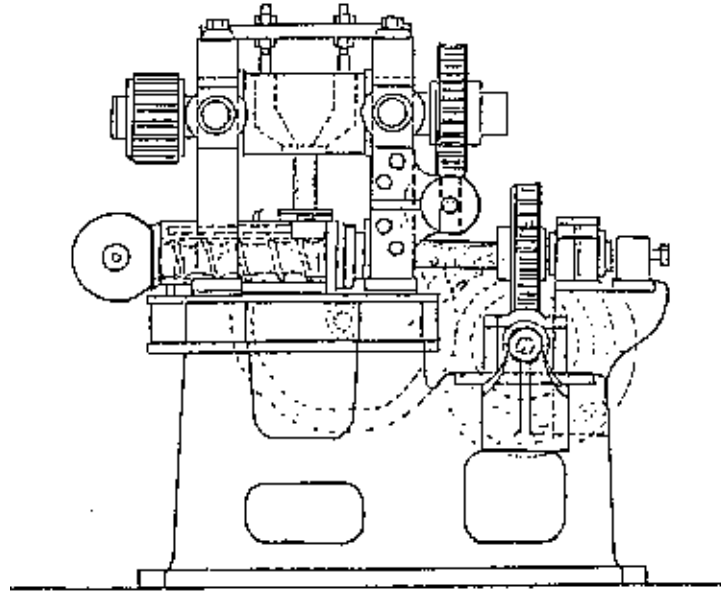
Drawing of Matthew Gray's wire insulation extruder [26].
